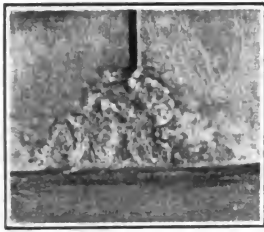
ONE HALF INCH CAST IRON, SHOWING WELD IN THE ROUGH, ALSO LOWER EDGE DRESSED OFF, HERE THE UNION CANNOT
